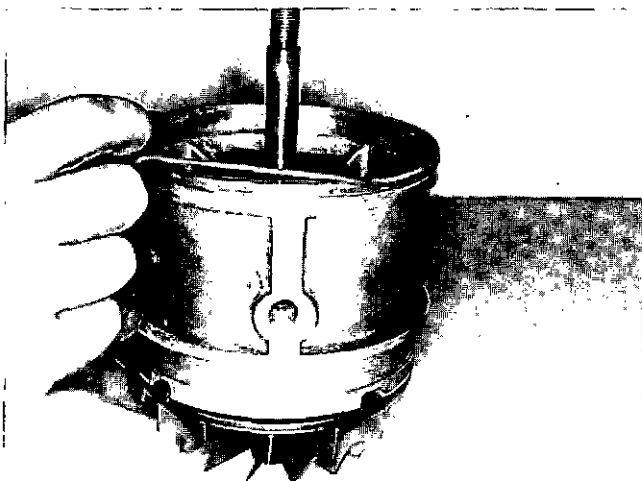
, (VTST40). Installing the O-ring onto the bearing housing
